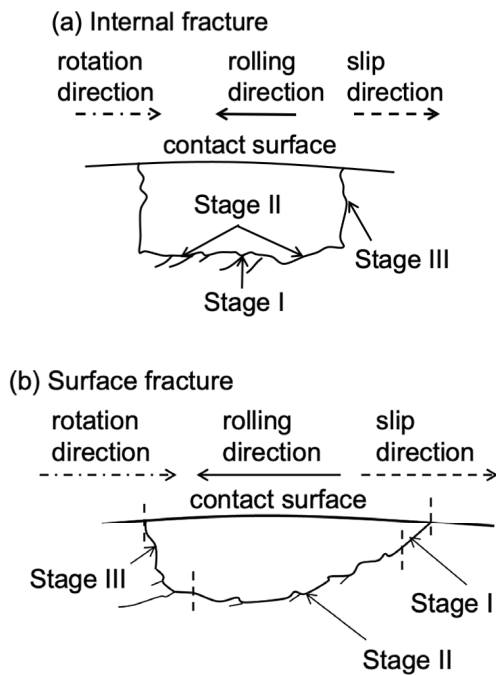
Schematic illustration of pitting failure at the specimen interior (a) and specimen surface (b).
